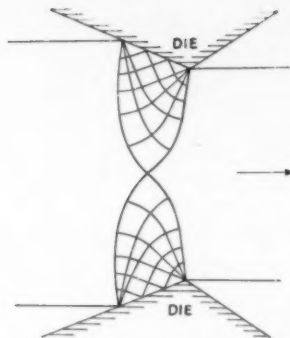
Slip-line field for the drawing of strip through a smooth die (after Hill).
